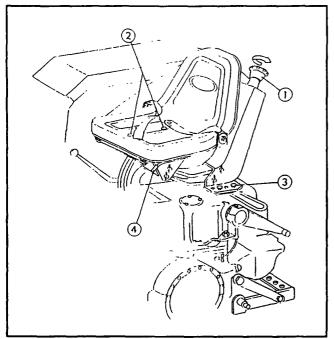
Seat Adjustment 1. Adjusting Knob; 2. Cap Screws; 3. Mounting Holes; 4. Lock Lever;
